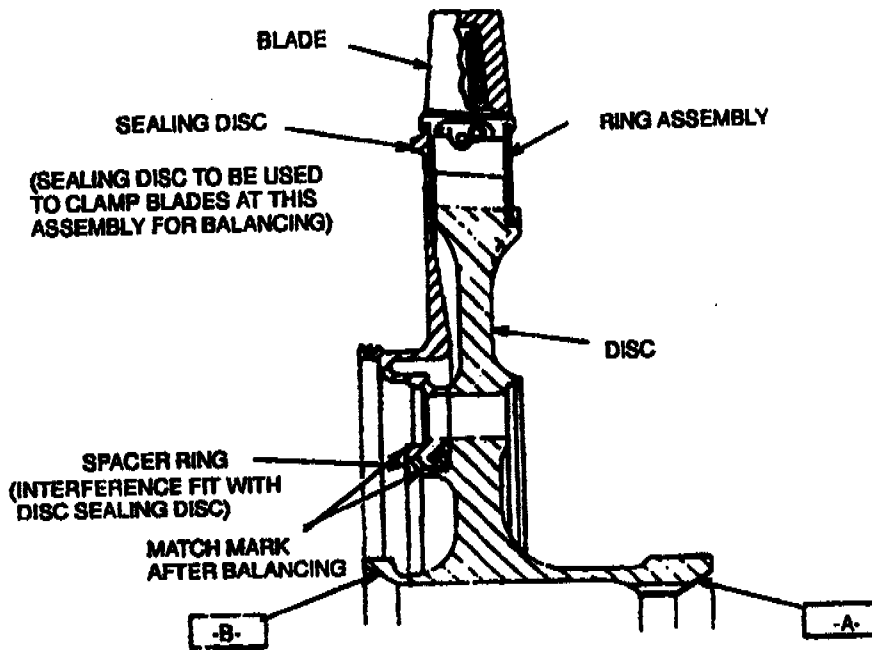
First Stage Gas Producer Turbine Rotor Assembly.
